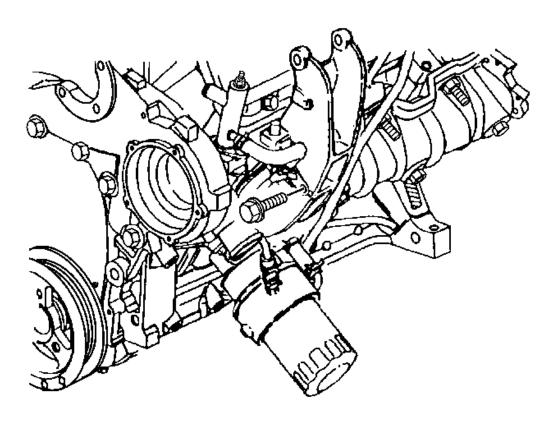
Installing Oil Cooler Pipe Bracket Bolt Courtesy of GENERAL MOTORS CORP.
